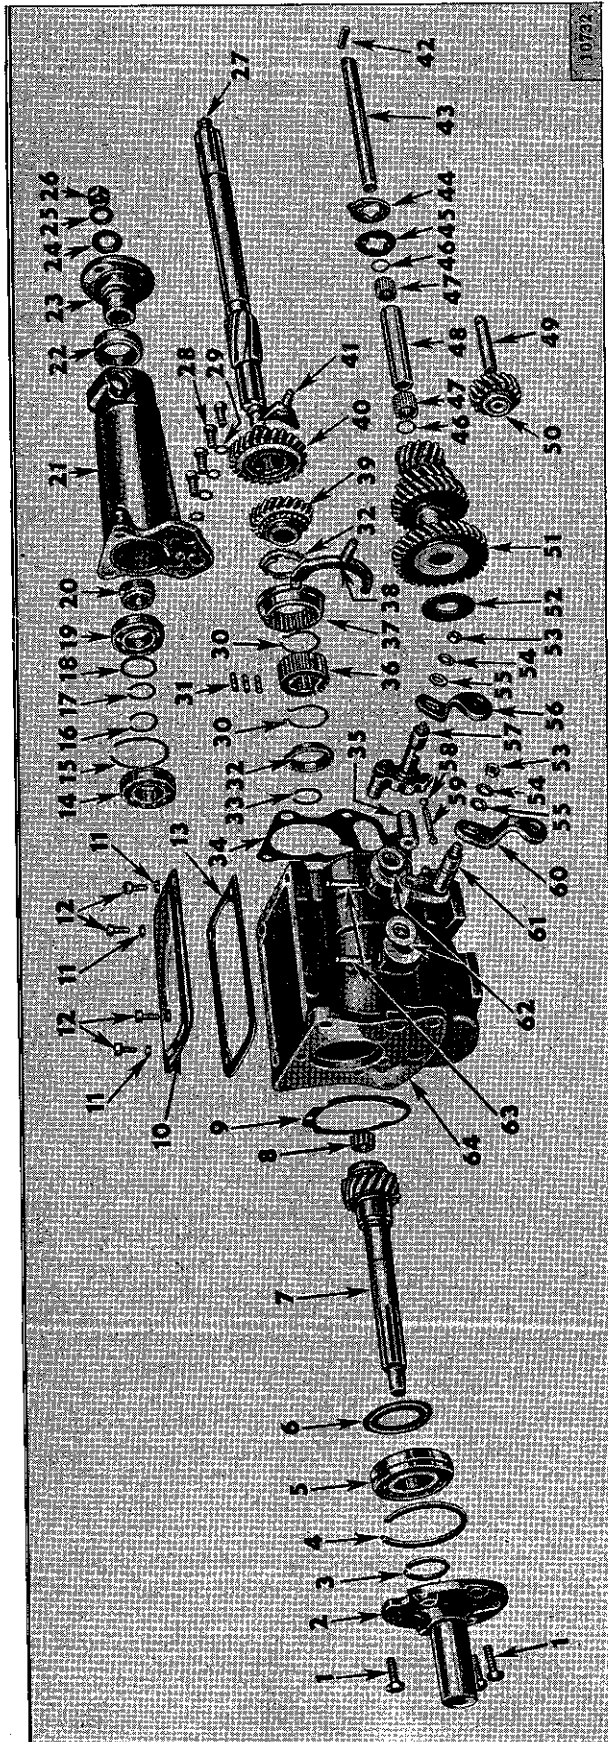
STANDARD TRANSMISSION—2-WHEEL DRIVE—WITHOUT OVERDRIVE
